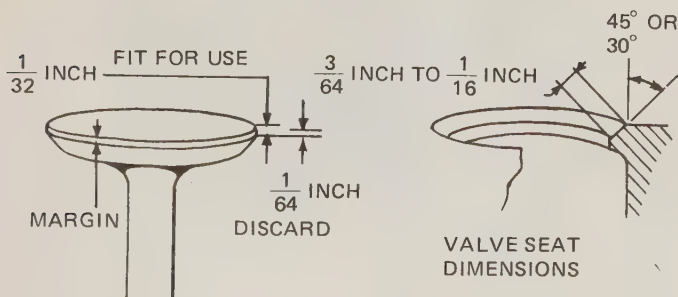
Valve and valve-seat dimensions. (Briggs & Stratton Corporation)
